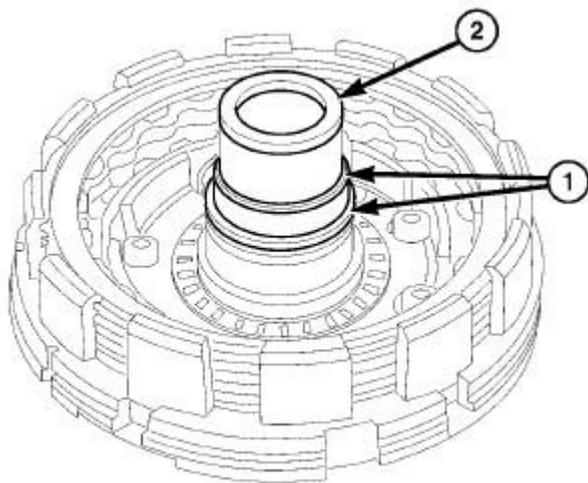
B1 Clutch Stack-Up - Single Sided Discs
